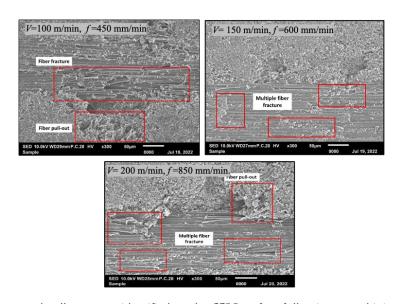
Fiber fracture and pull-out were identified on the CFRP surface following a machining length of 20 meters
